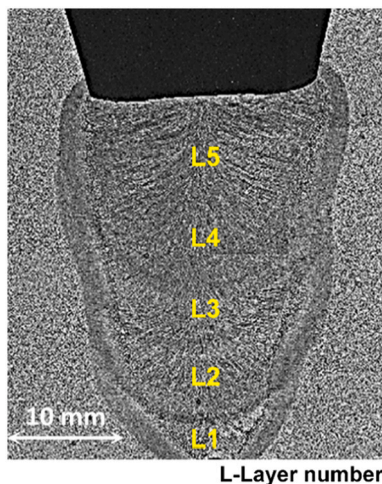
Macrograph depicting the deposited layers in a typical single-pass-per-layer groove welding.
